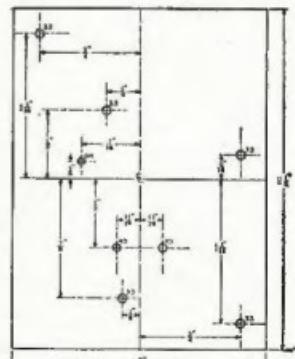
Drilling details on the circuit board chassis. The board is $1/16$ inch thick and preferably with copper on both sides. If just one side is copper, drill as shown from the copper side. The numbers by the side of each hole indicate the drill gauge.
